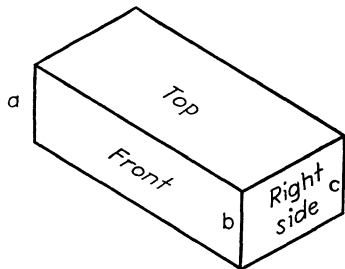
Isometric view of a rectangular block. Lines *a*, *b*, and *c* represent equal dimensions that in isometric (equal-measurement) drawing all appear of equal length.
